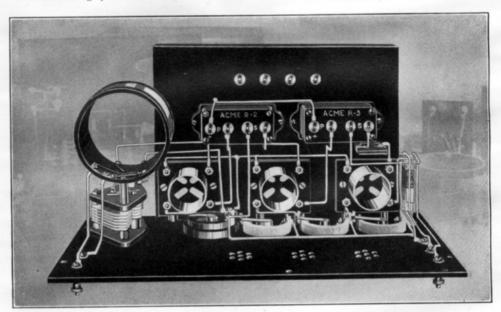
The base panel which carries the transformers and battery binding posts is secured to the under sides of the sockets, and they, in turn, are fastened to the rear of the front panel
